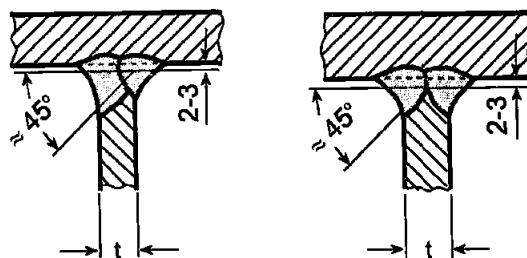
Single and double-bevel welds with full root penetration
